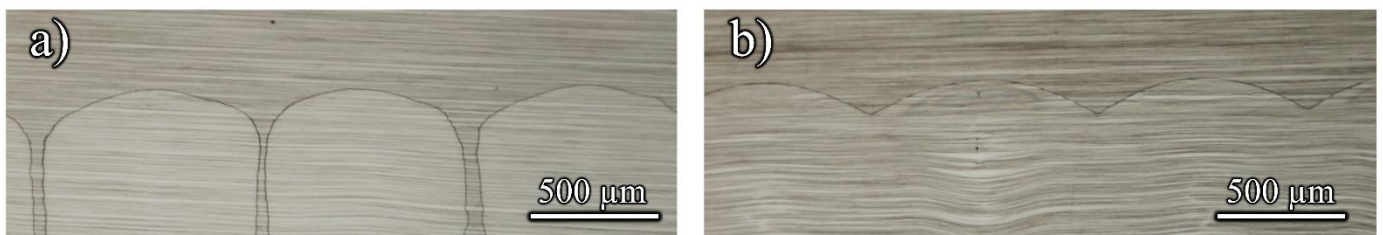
Welding lines side by side for samples bearing a) 1-layer CNT-web and b) 2-layers CNT-web
